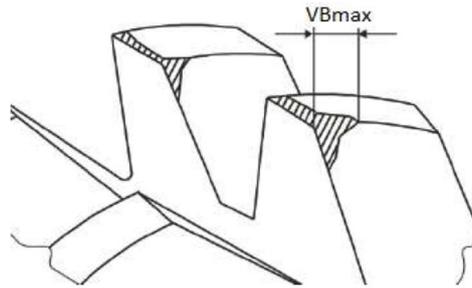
Maximum flank wear on the tool hob (Stachurski, 2012)
